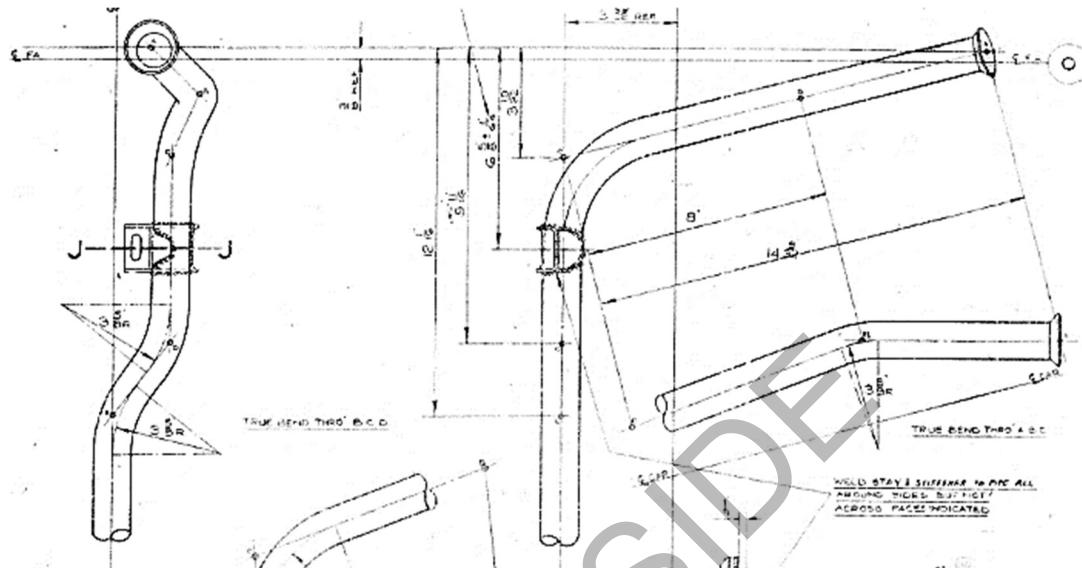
Exhaust pipe detail near engine AYA2021.
